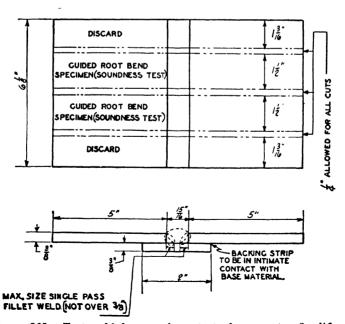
Test weld for soundness tests for operator Qualification
